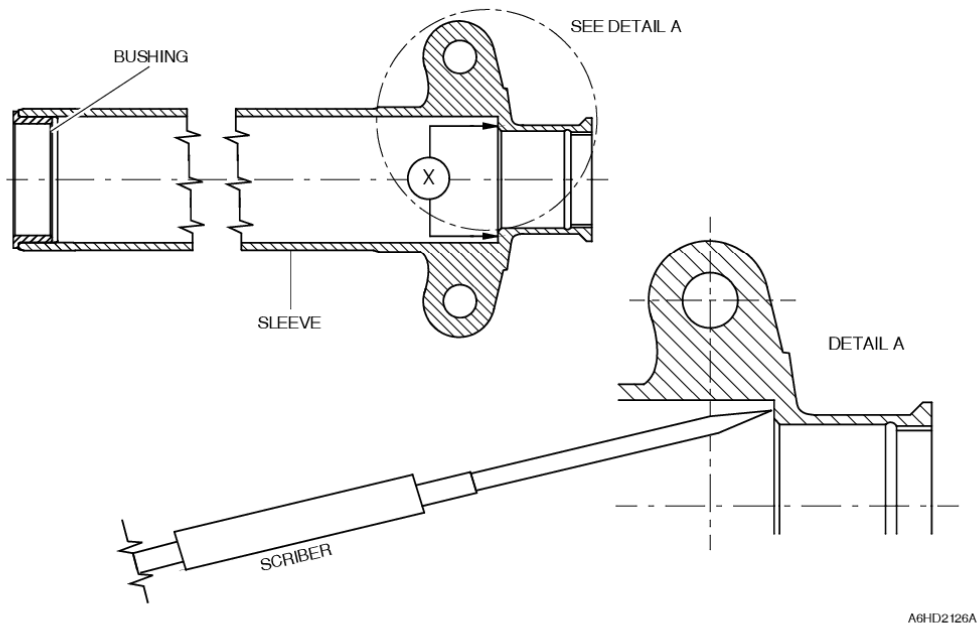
A. Tail rotor sleeve - Mating surface inspection
